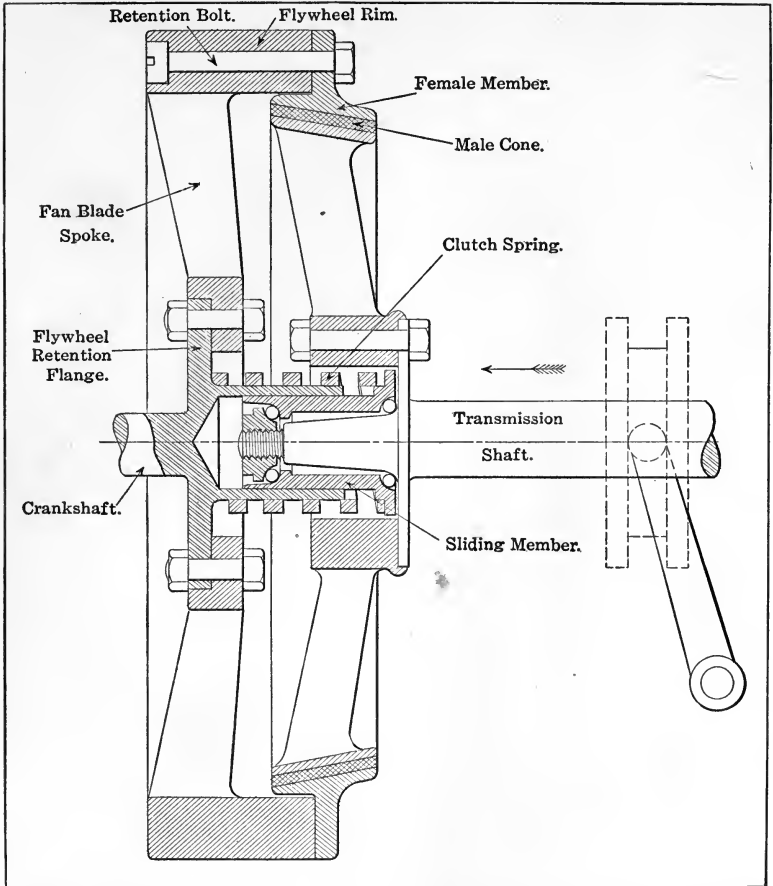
Cone Clutch Design with Female Member a Separate Casting Bolted to Fly-Wheel Rim.
